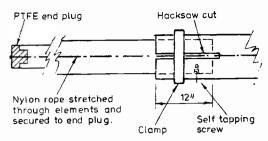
DETAIL OF ELEMENT JOINTS AND VORTEX SUPPRESSION ROPE
